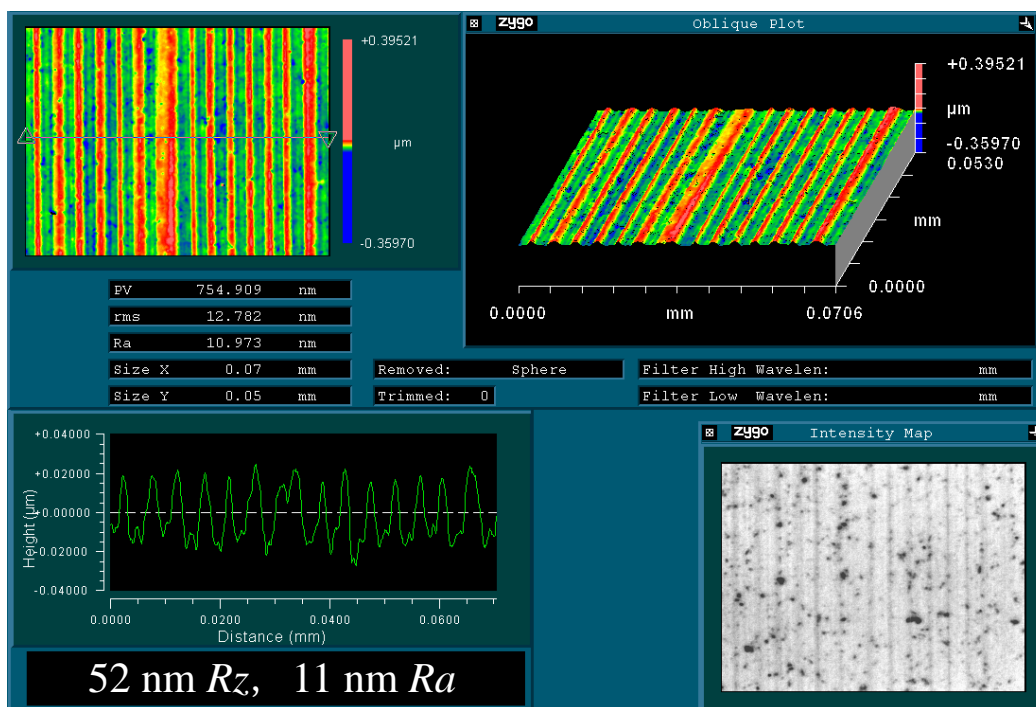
Form deviation profile of machined Fresnel mold.
